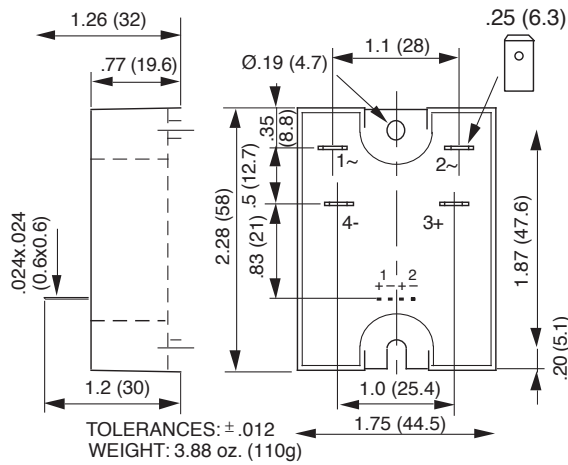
SD48D40-06, SD24D40-06 and SD24R40-06; dimensions in inches (mm)
